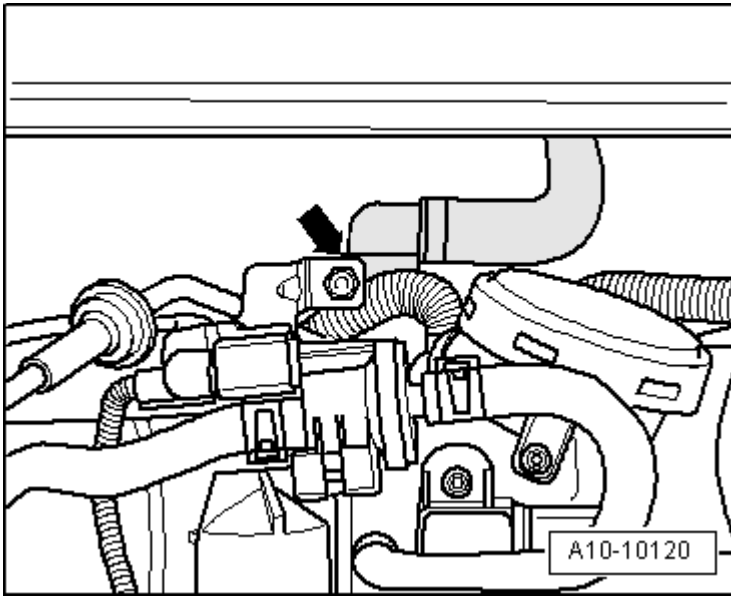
Removing Coolant Hose To Heater Core On Rear Of Engine
